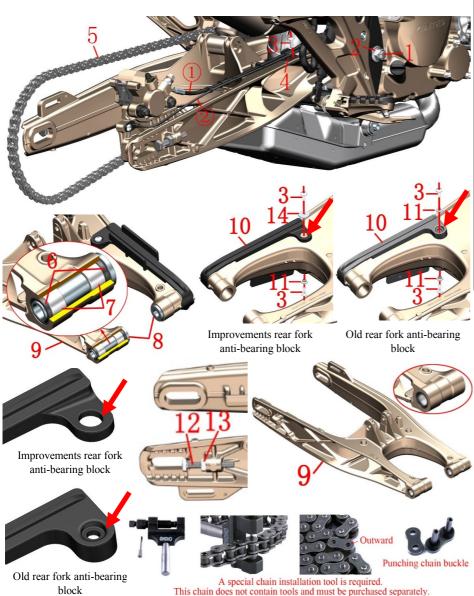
Rear wheel, swinging arm component		Rear swinging arm component	CHK	40)
